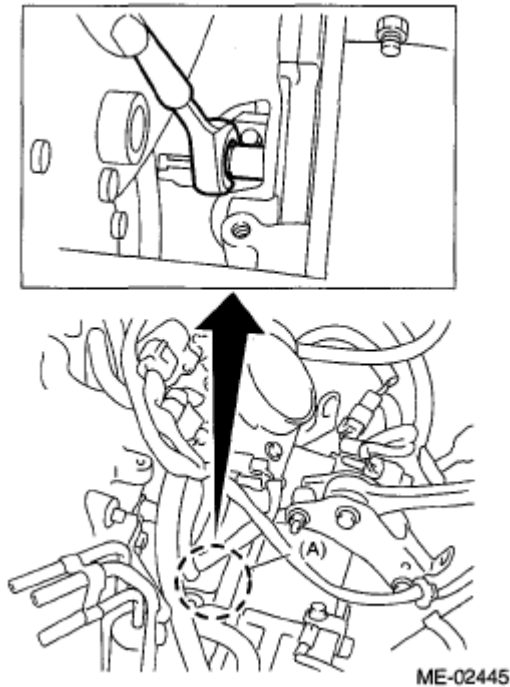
Locating Transmission Lower Side Bolts And Nuts
